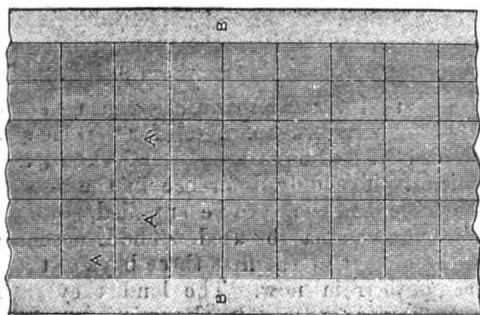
Section of Guard with upper covering removed to show metal section.
